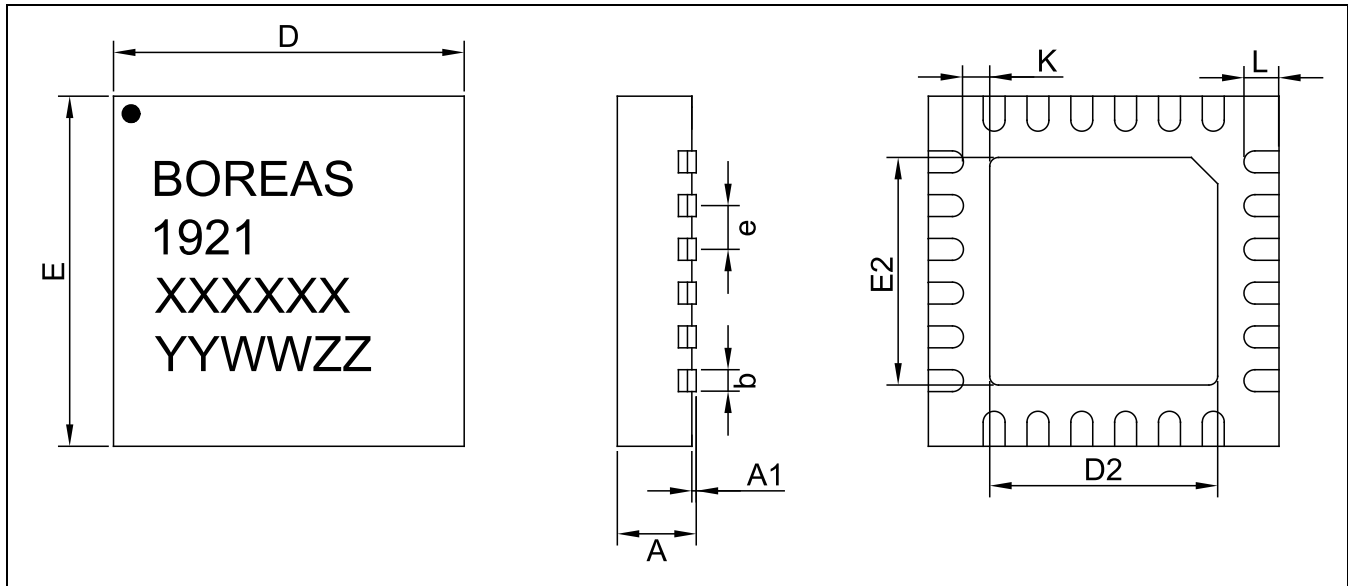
QFN 24L 4.0mm × 4.0mm package outline drawing
